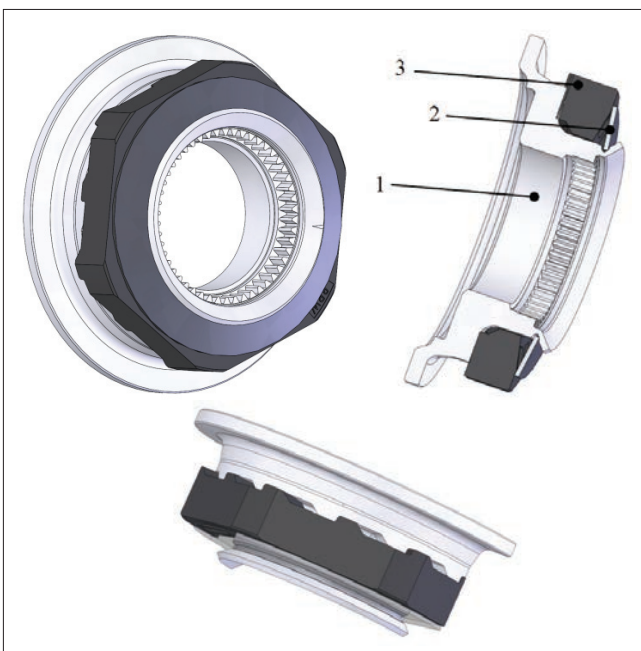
Special nut for bearings: 1 – nut, 2 – plate spring, 3 – toothed washer
